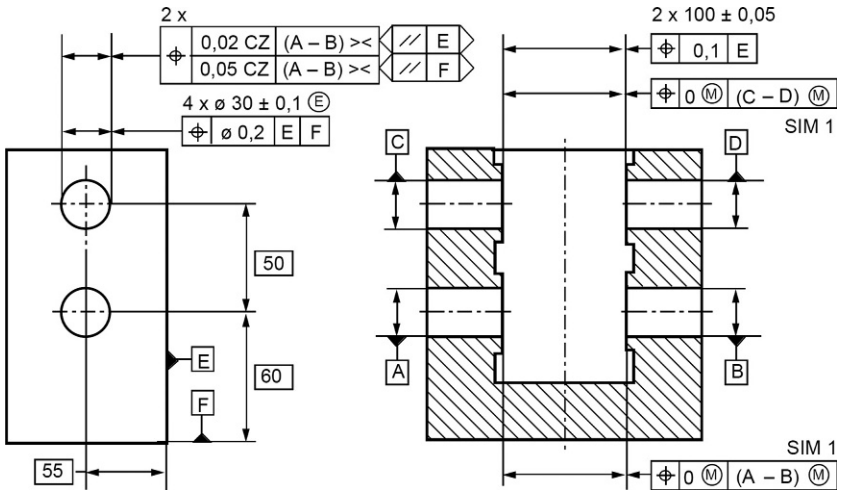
Tolerancing with and without M , gearbox, complete tolerancing
